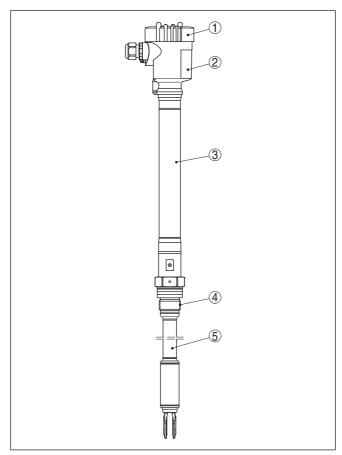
VEGASWING 66 with plastic housing and tube extension
